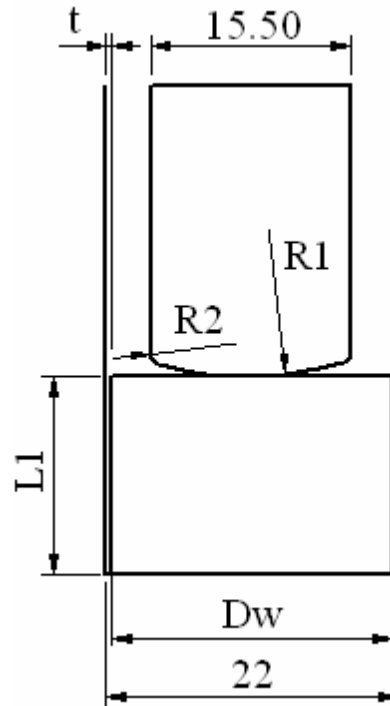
Die and workpiece geometries (dimensions are in mm)
